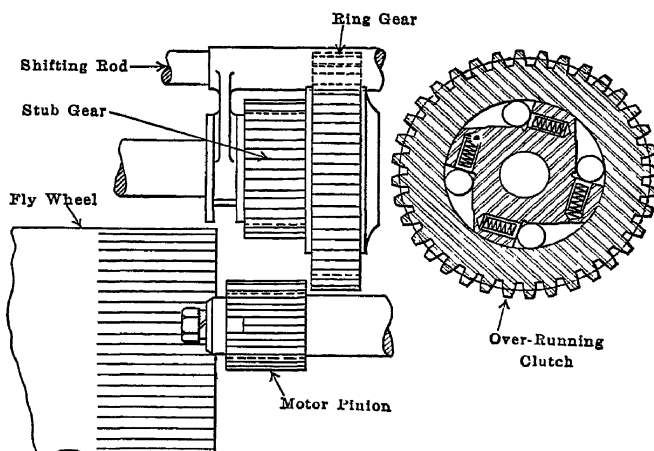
Starting gears and over-running clutch on Delco motor-generator.
